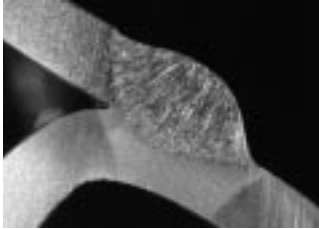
Strip attached to car seat rail, welded with PZ6105R-1.4 mm. Welding time 14 seconds. Note the full penetration and improved weld appearance.
